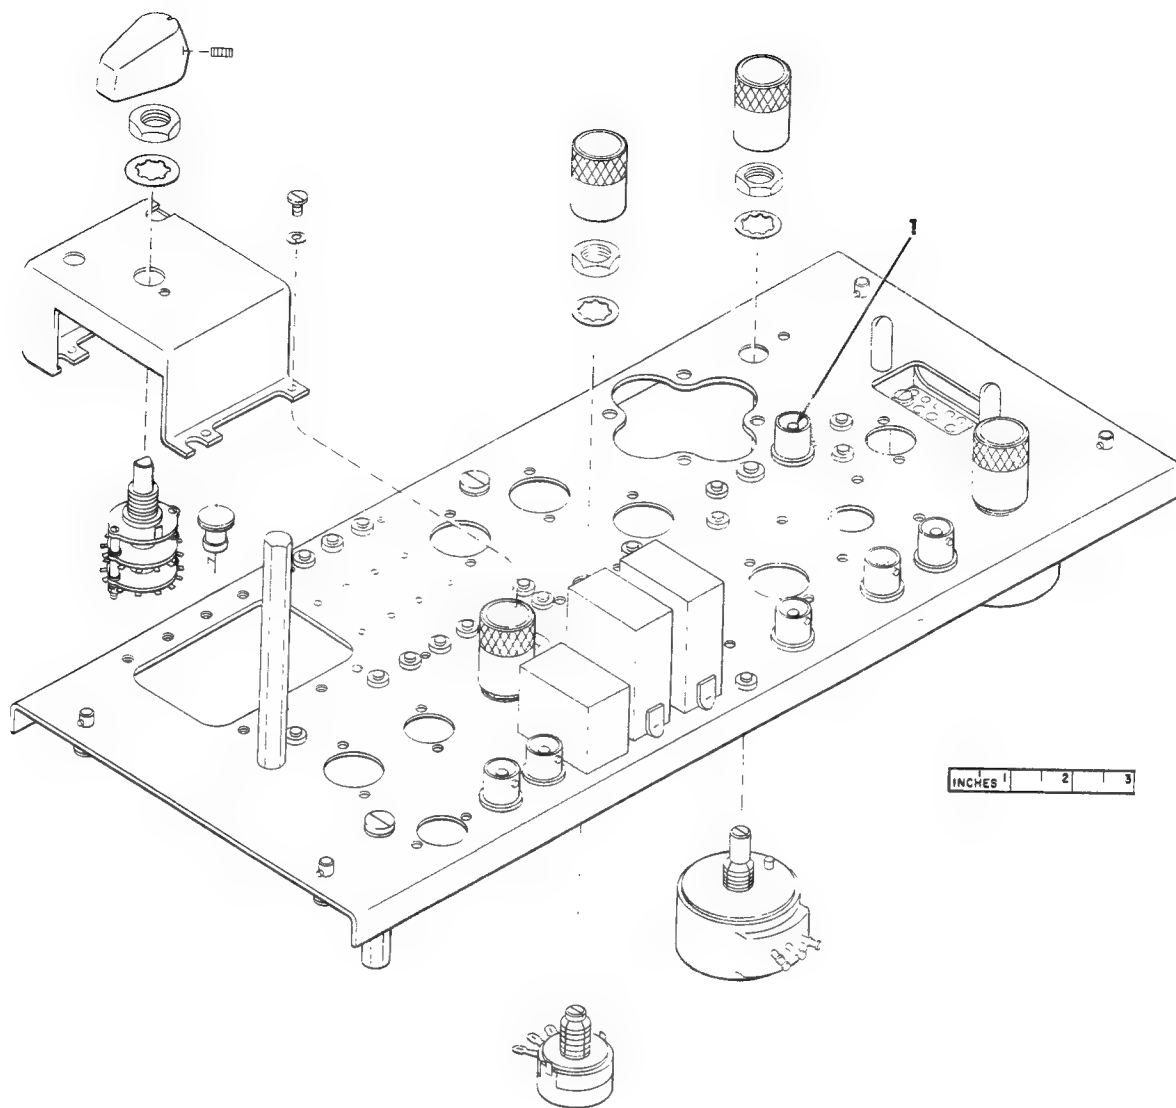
Synchronizer, electrical (9144786)—partial exploded view
